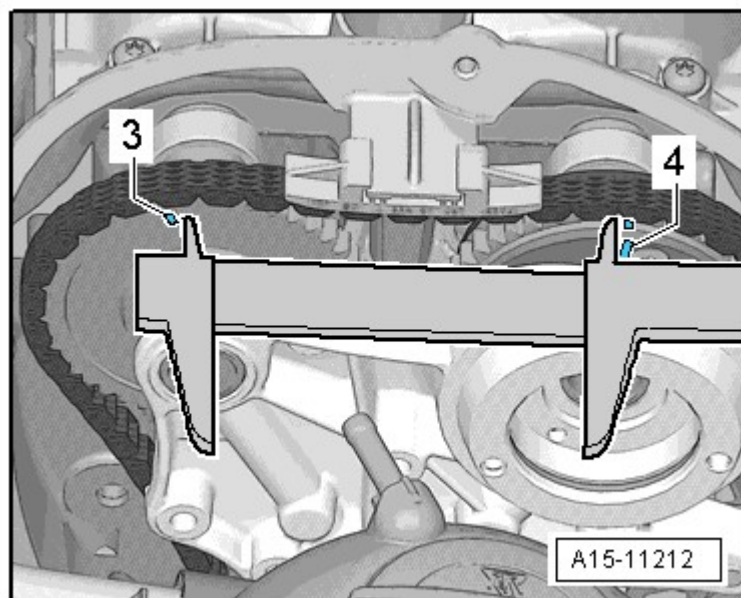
Measuring Distance Between Marking On Exhaust Camshaft And Marking On Intake Camshaft
